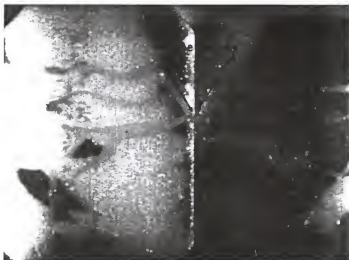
Fracture surfaces of a flexure bar joined using a gel-derived (4 mol% Cr_2O_3) interlayer.
